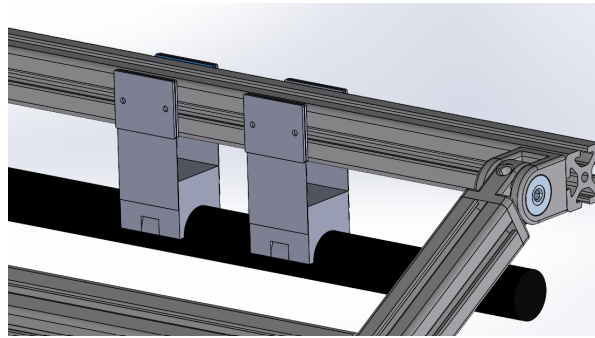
Complete flexure assembly showing the handlebar mounts, flexures, and support plates. Flexures are clamped on both sides of the extrusion profile to constrain longitudinal deformation.
